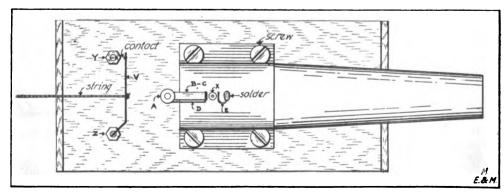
TOP VIEW OF THE FINISHED CANNON, SHOWING THE ARRANGEMENT OF THE DIFFERENT PARTS FOR IGNITING THE CHARGE
